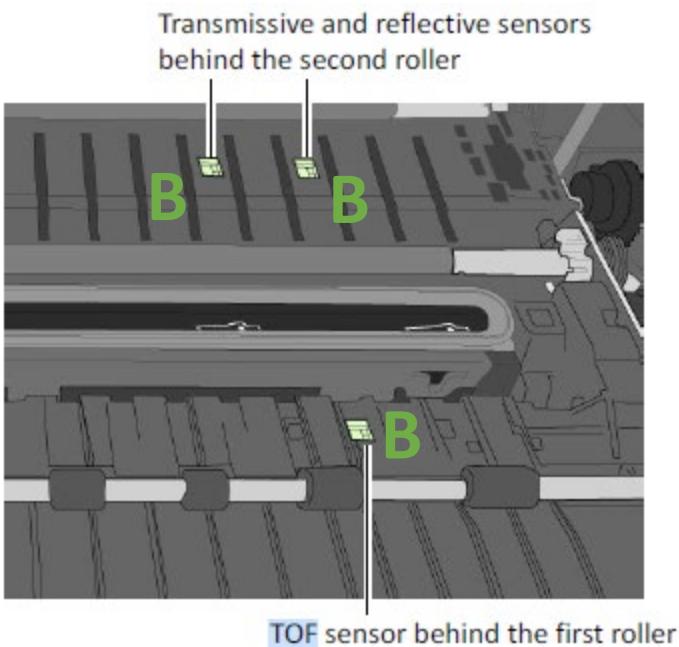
, Overhead View of the Print Engine with Media Sensors Labeled
